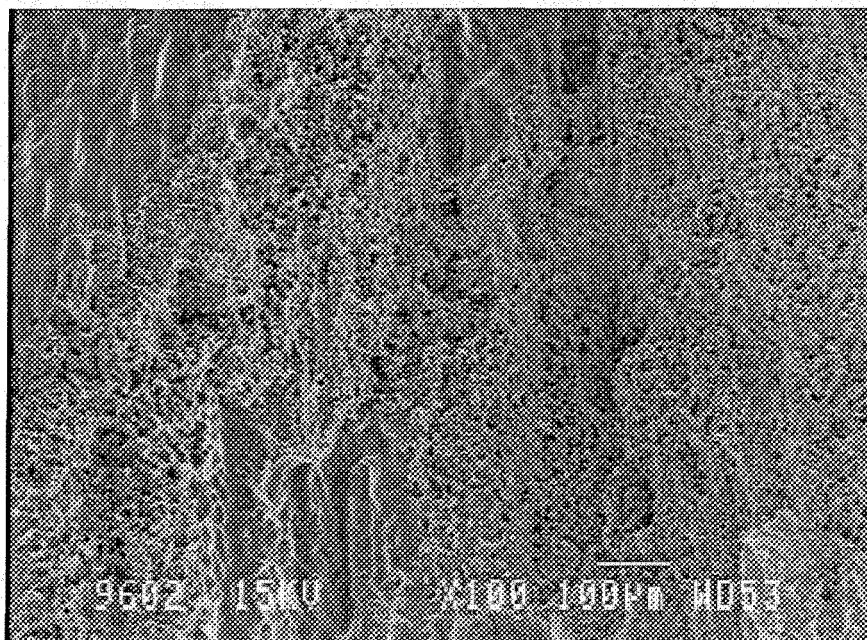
SEM of hot-tearing surface of test 1035 for AA1050, which shows that some connected dendrites were ruptured when hot-tearing occurred: a) Inside area with 100X magnification;
